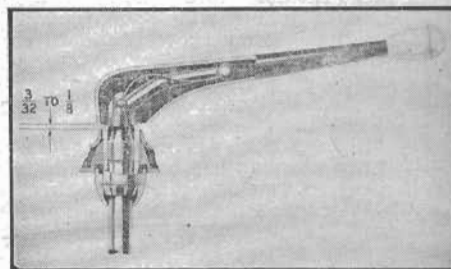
Steering column upper support-to-control lever clearance. 1952-53 Powerglide
